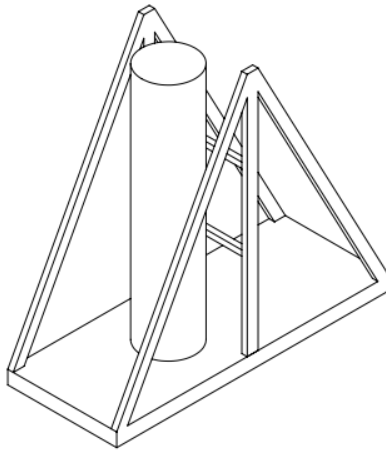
Isometric view of the motor as it is secured to the frame of Design 1.
